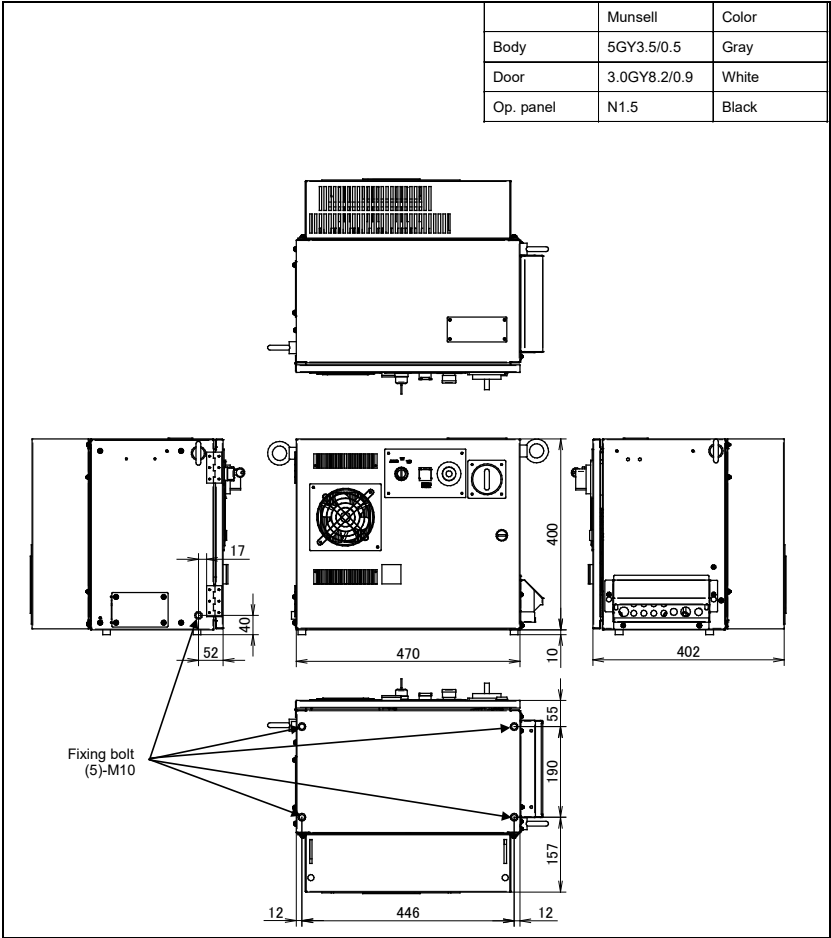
(e) Controller external dimensions (R-30iB Mate Controller)
